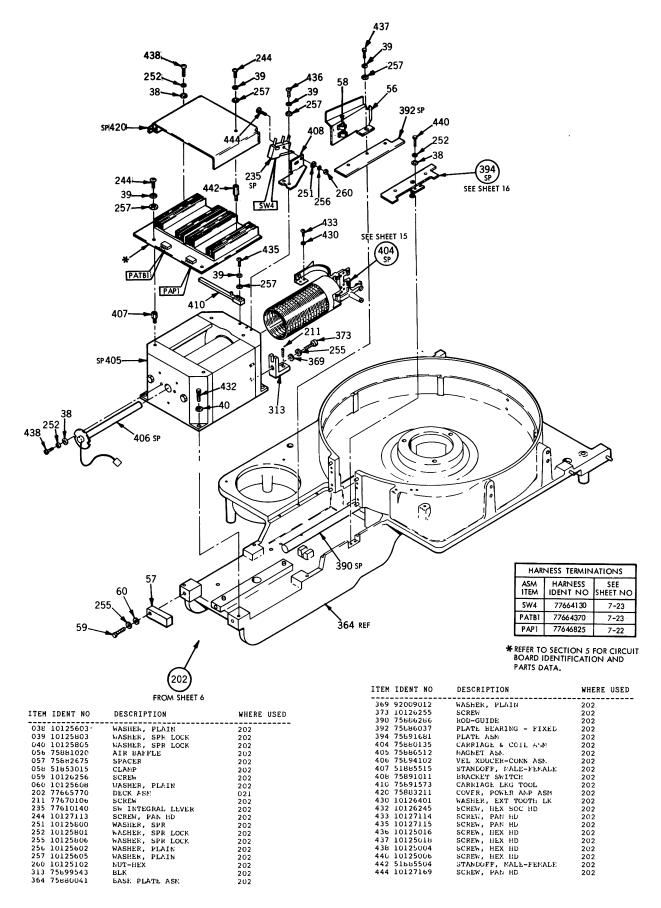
DECK ASSEMBLY (SHEET 2 of 3)
